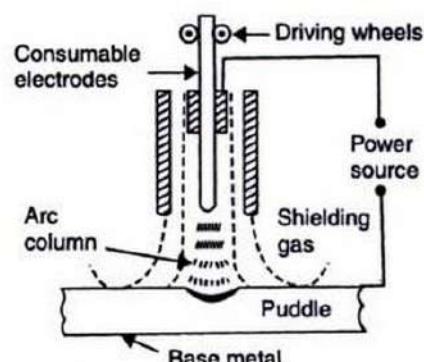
Metal inert gas (MIG) welding.
